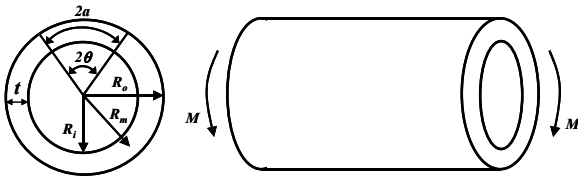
Circumferential through-wall cracked pipes under bending
